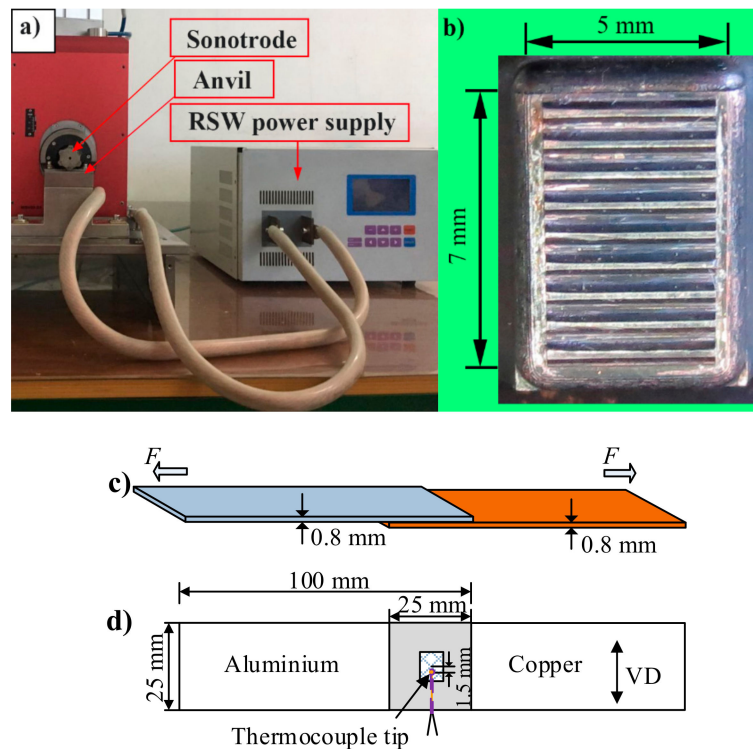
(a,b) The RUSW machine setup; (c) configuration of the tensile-shear, and (d) temperature measurement tests setup.
